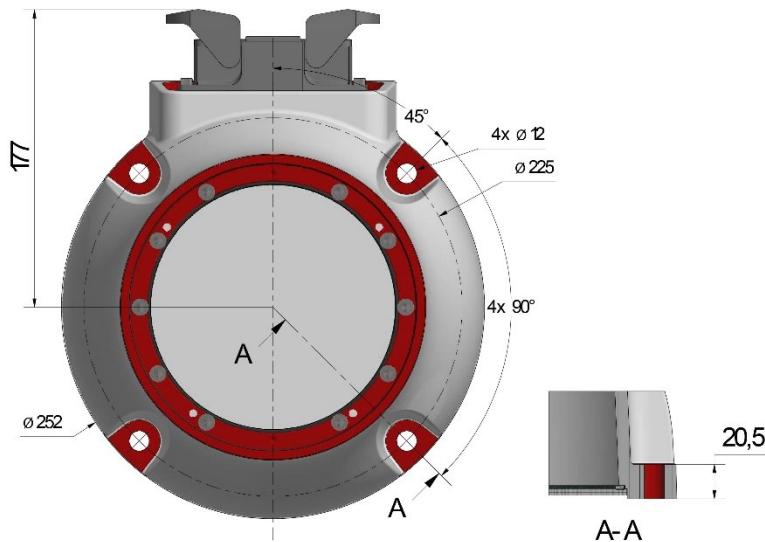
Installation dimensions of robot base (all dimensions in mm)
